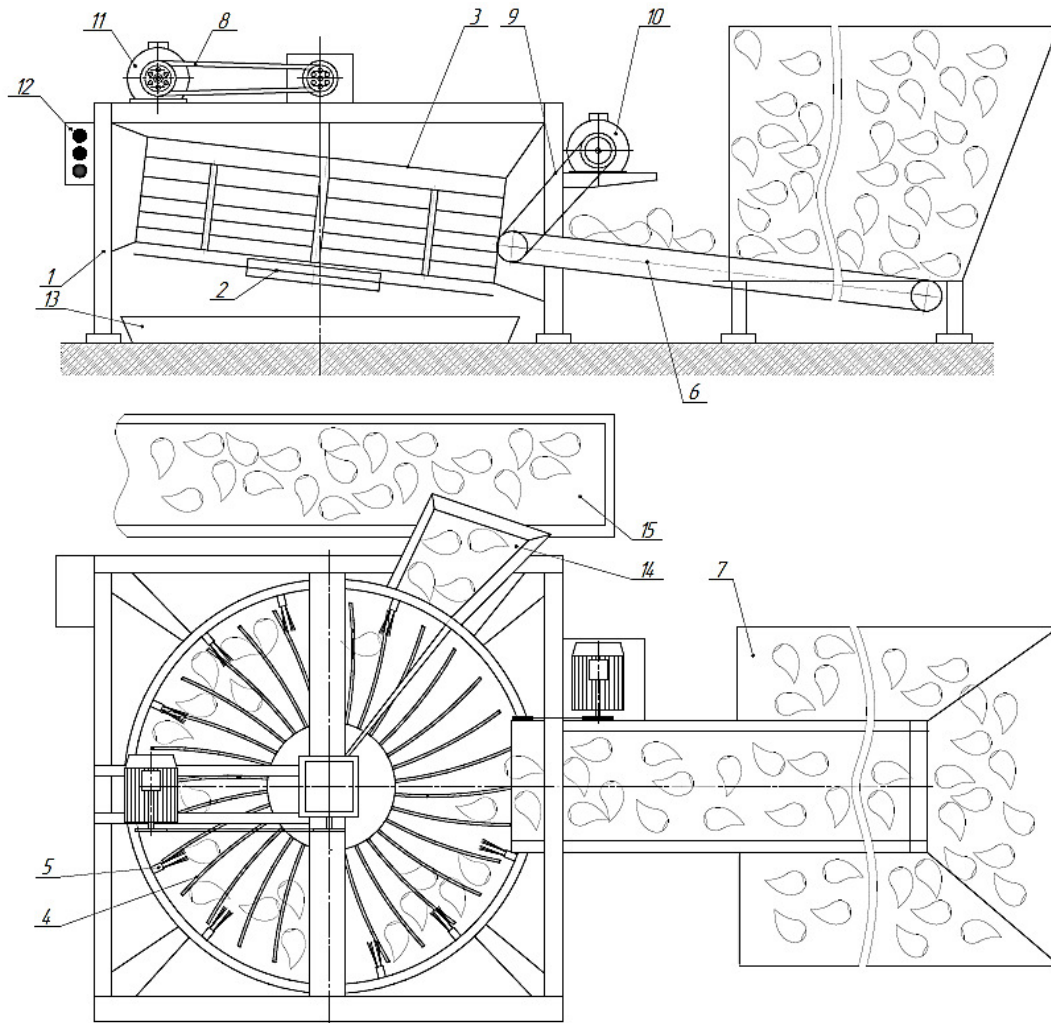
Diagram of the device for cleaning sugar beet roots: 1 – frame; 2 – rotary cleaner; 3 – protective grating; 4 – curvilinear rod; 5 – elastic cleaners; 6 – feed conveyor; 7 – storage hopper; 8, 9 – chain drives; 10, 11 – gearmotors; 12 – control panel; 13 – impurity pool; 14 – guide chute; 15 – unloading conveyor.
